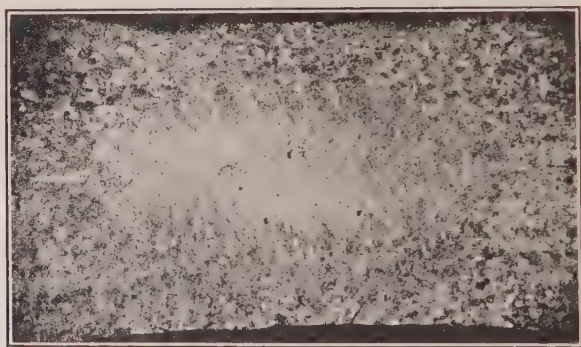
CROSS-SECTION OF A SPOT WELD. NOTE CONTACT SURFACES OF THE TWO SHEETS AT RIGHT AND LEFT. THE OVAL AREA IS THE SPOT.
